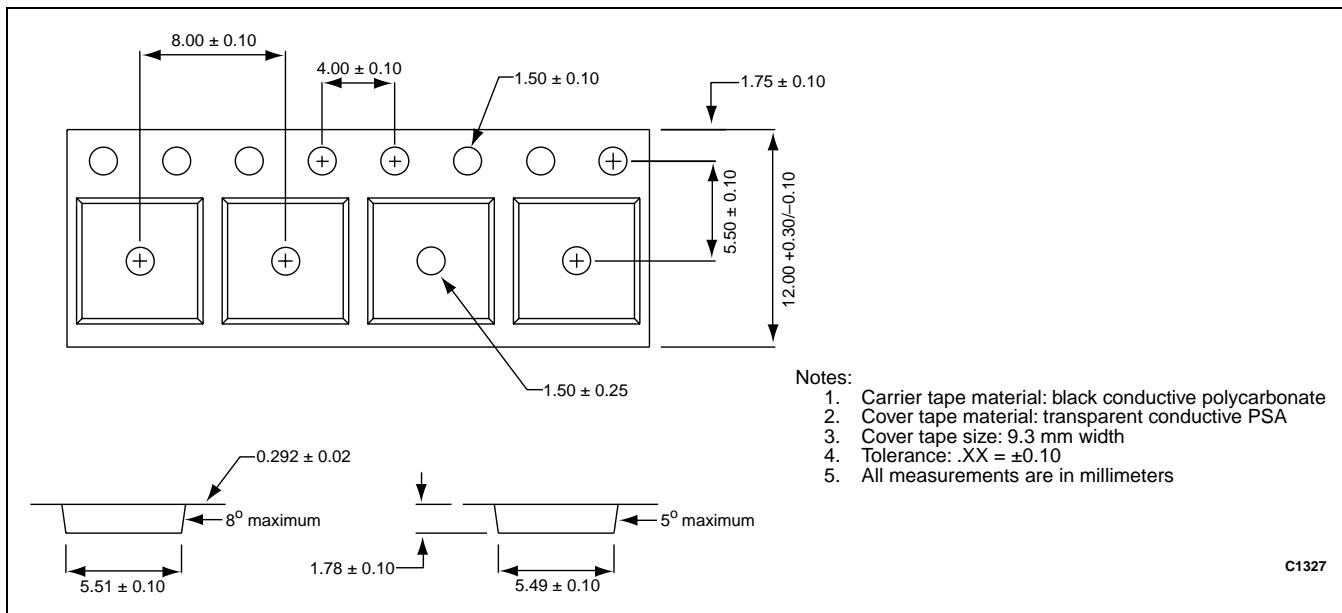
SKY73001 32-Pin RFLGA Tape and Reel Dimensions
